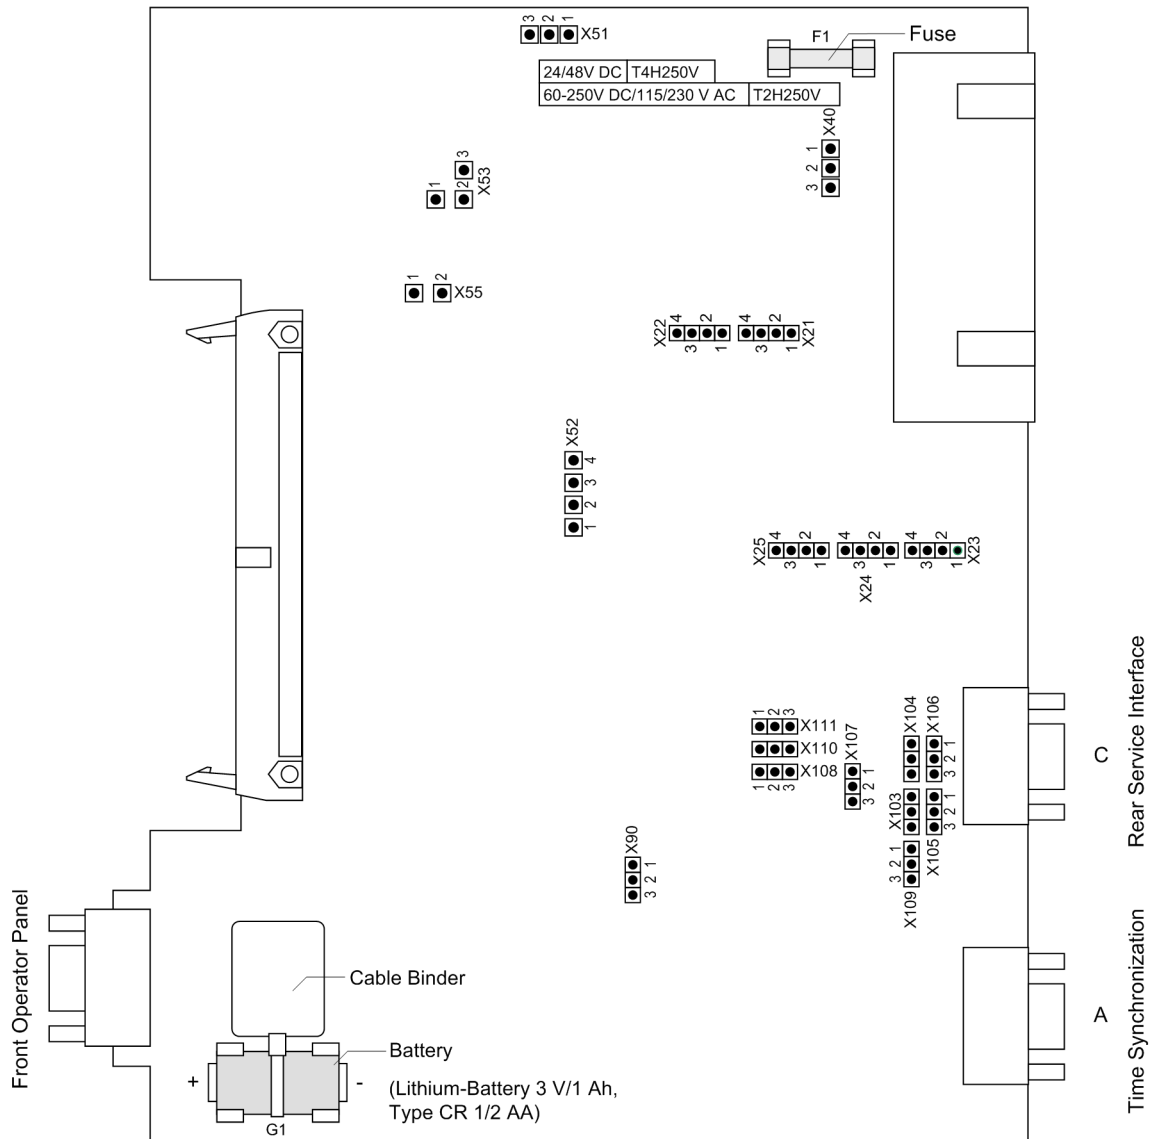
Processor printed circuit board C-CPU-2 with jumpers settings required for the board configuration
